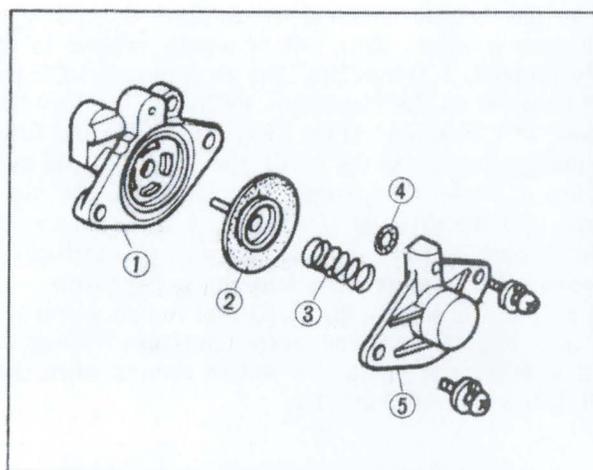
(1) Air-cut valve body (4) O-ring
